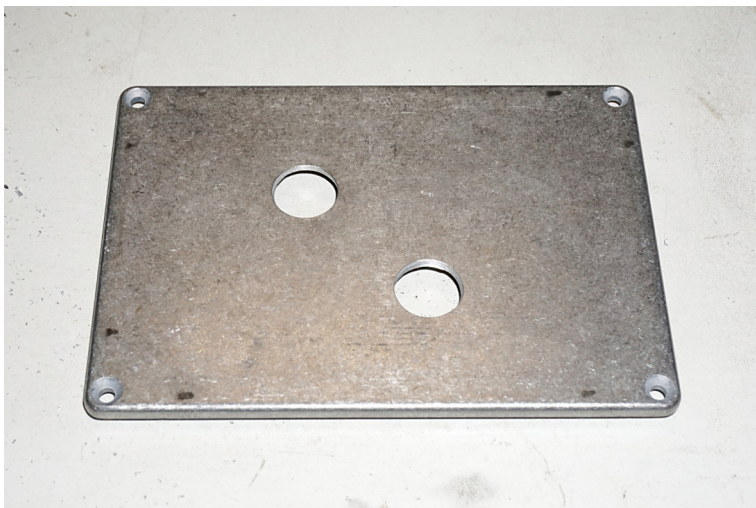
The drilled holes in the lid of the aluminum box. Deburr the edges to avoid cable damages.
